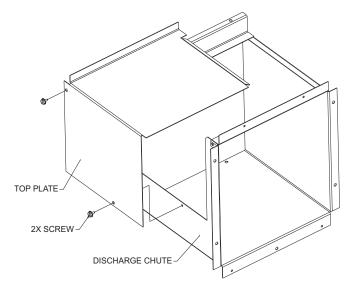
DISCHARGE CHUTE ASSEMBLY
